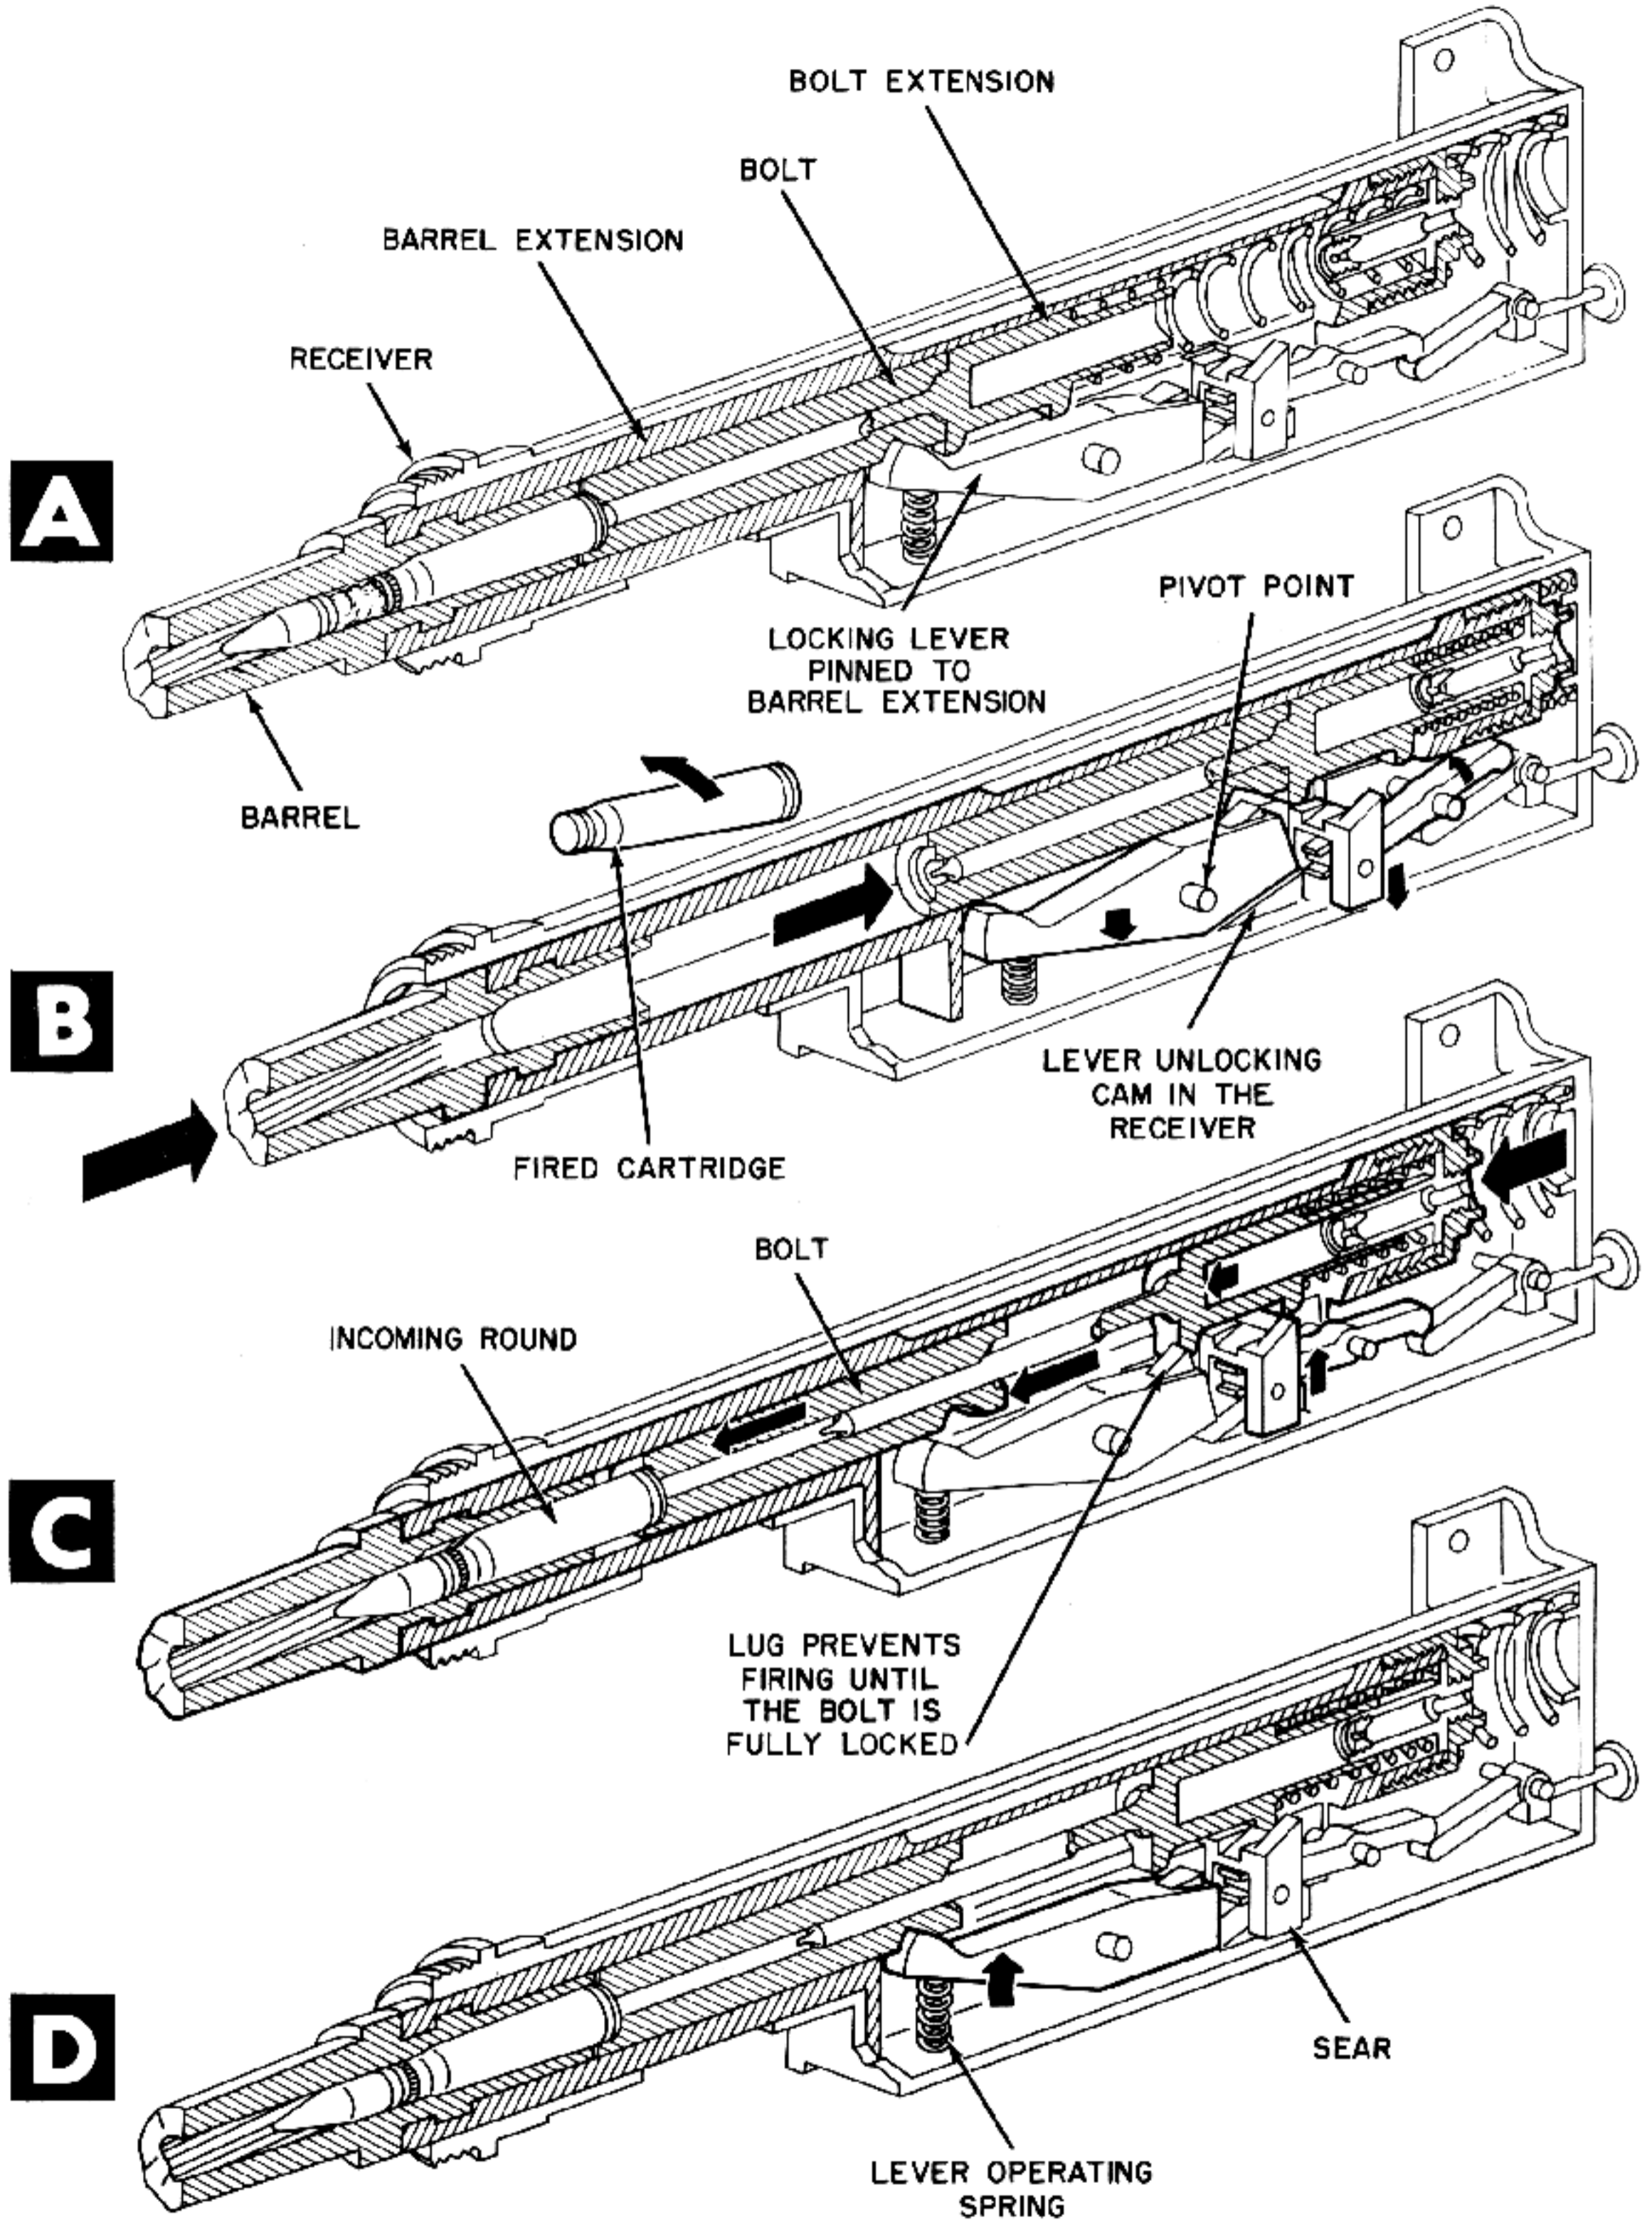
Barrel Extension Recoils, Camming Locking Lever Free of the Bolt.
